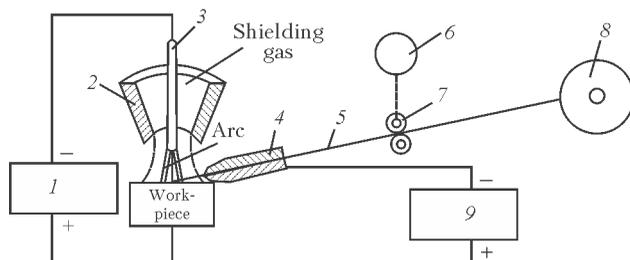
Schematic of hot-wire GTAW system [6]: 1 — GTAW power supply (CC mode); 2 — nozzle; 3 — tungsten electrode; 4 — contact tube; 5 — filler wire; 6 — wire feeder; 7 — feed rolls; 8 — wire reel; 9 — hot wire power supply (CV mode)
